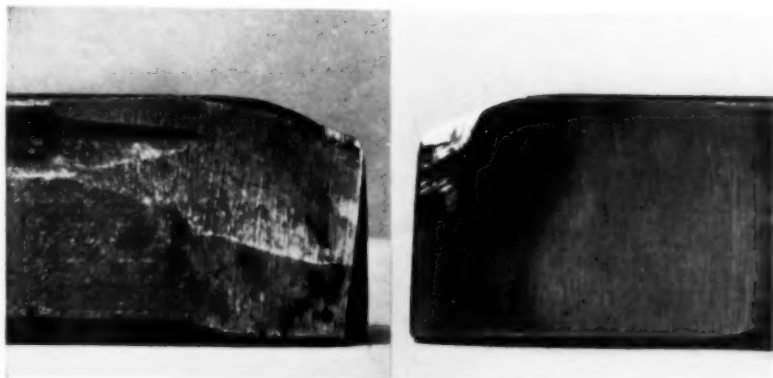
NO-CLEARANCE TOOL, FULL SIZE
